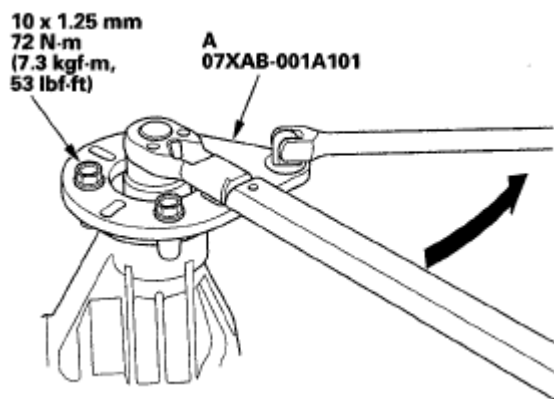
Identifying Companion Flange Holder To Companion Flange
